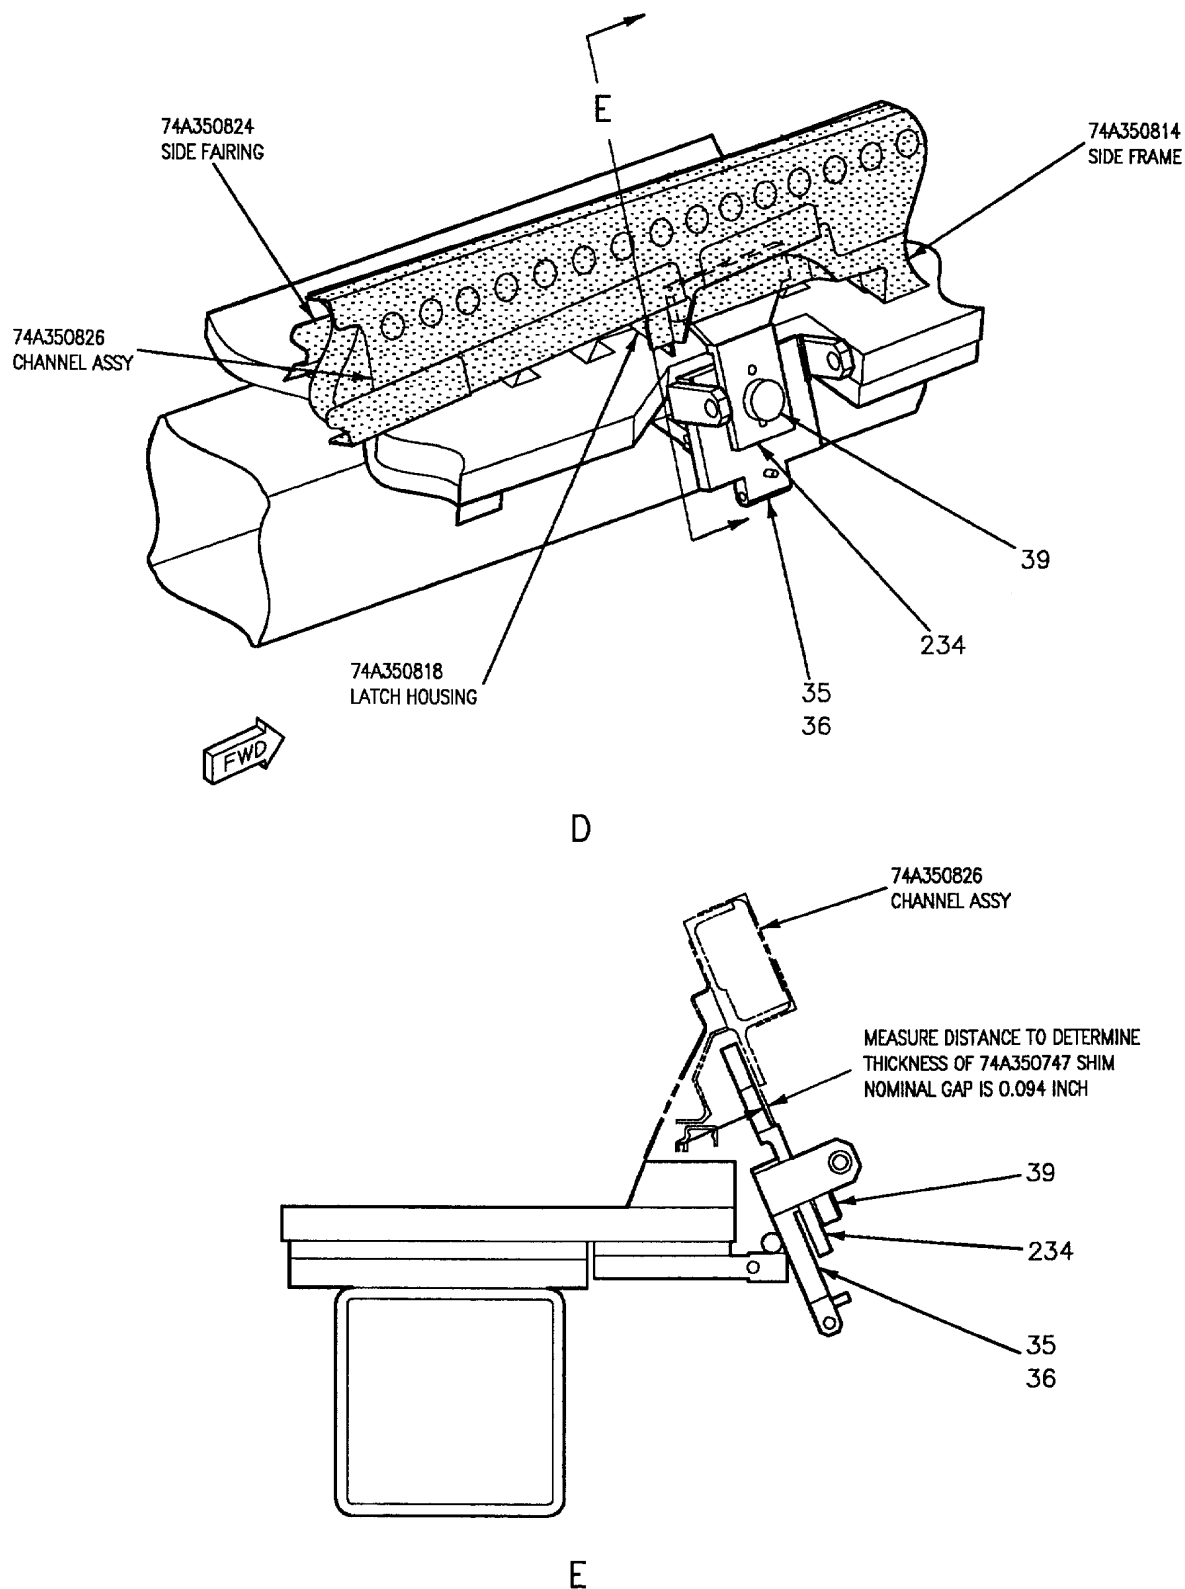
Replacement - Latch No. 2 (Sheet 3)
